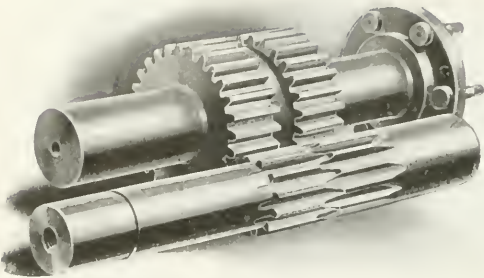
Close View of Staggered Tooth Construction on Saw and Gear Arbors
